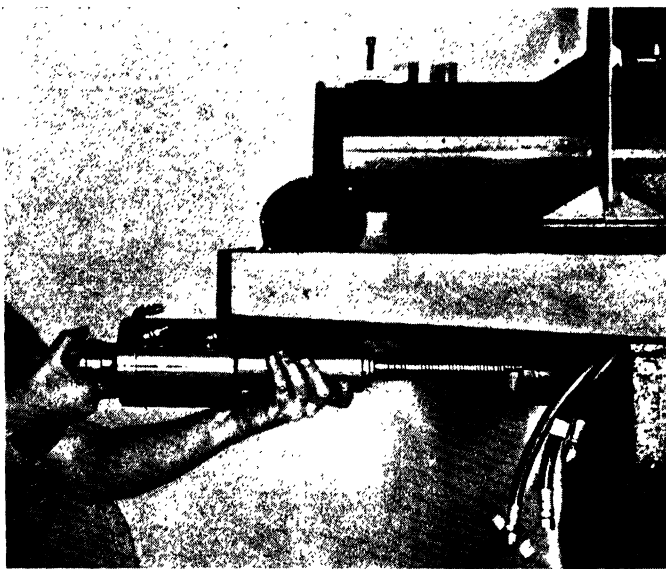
INSTALLING LEAD SCREW ON EX-CELL-O THREAD-GRINDING MACHINE (STYLE 35)
